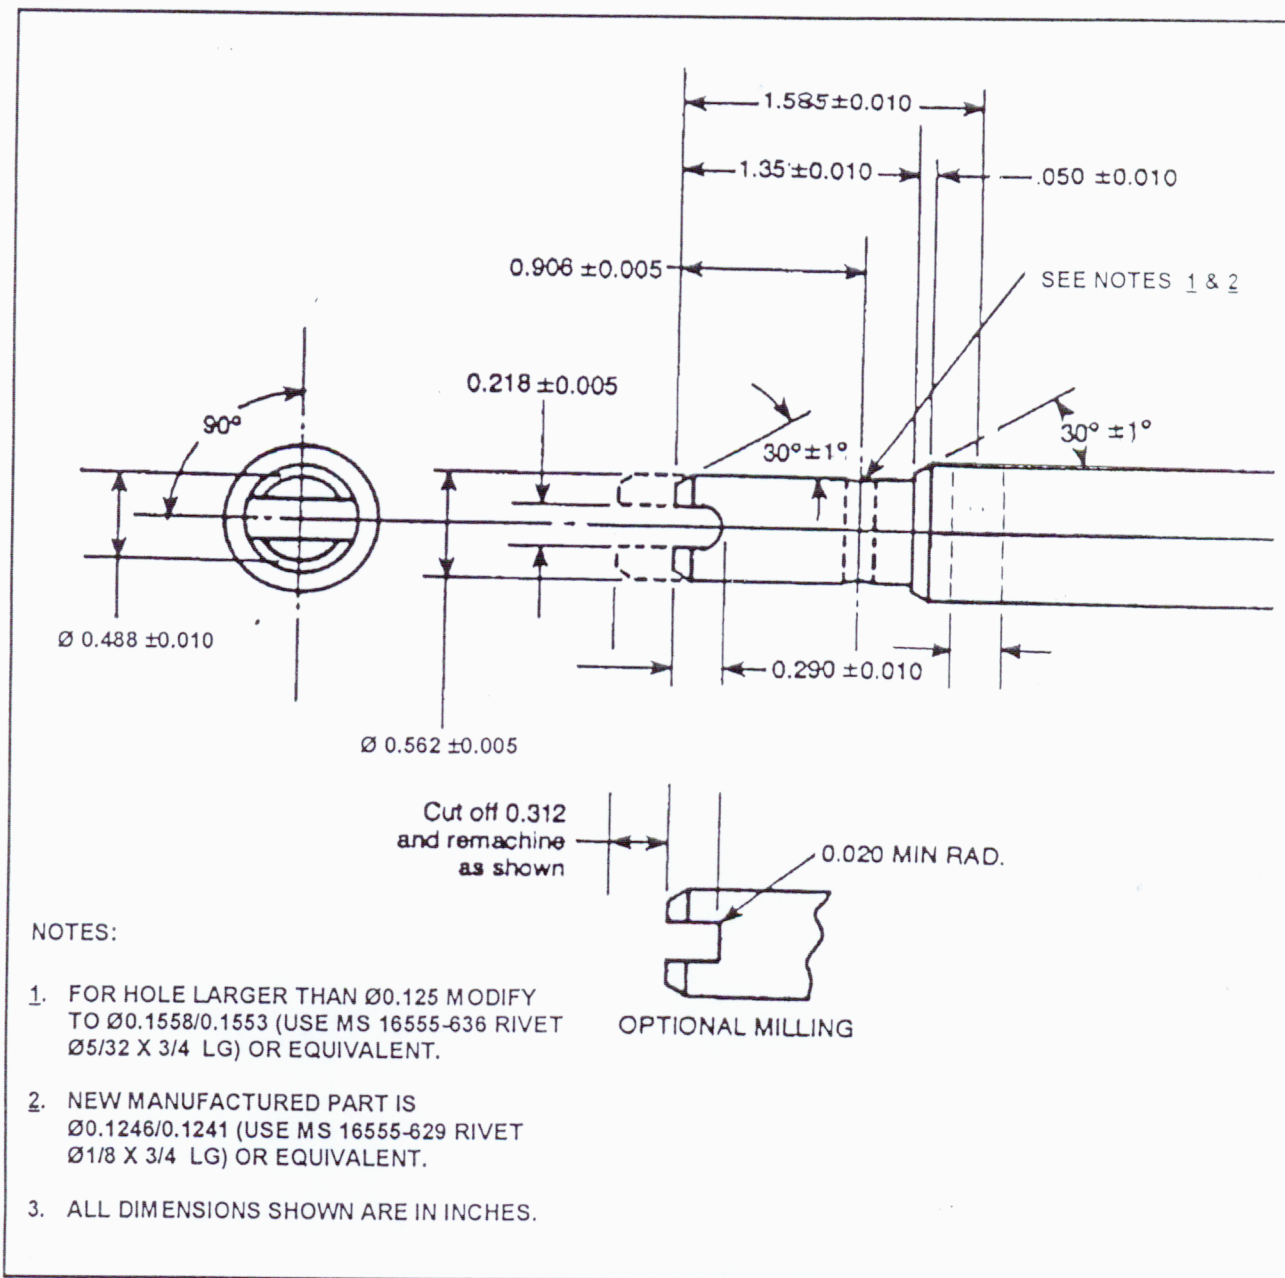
MACHINE SHOP REWORK DIMENSIONS FOR NIPPLE
